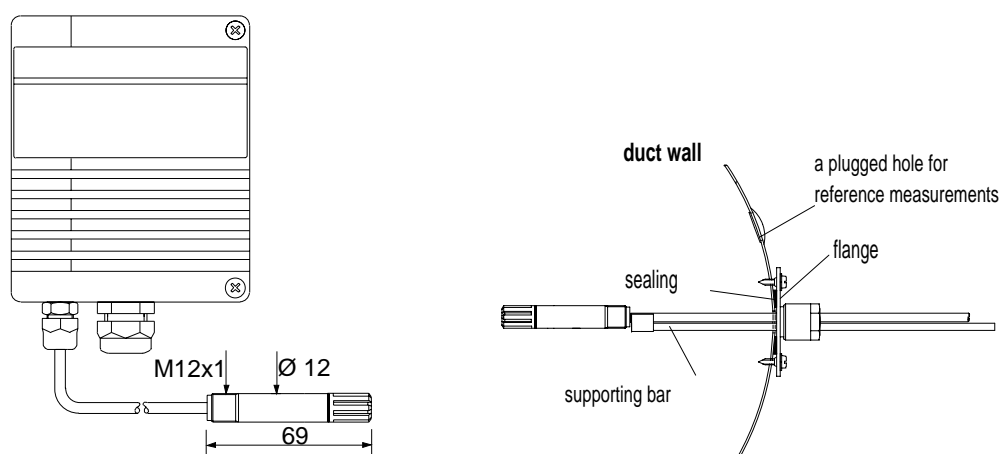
Dimensions of the HMP143A probe (in mm) and installation in a channel with the help of flange (part no. HMP233FA) and supporting bar
